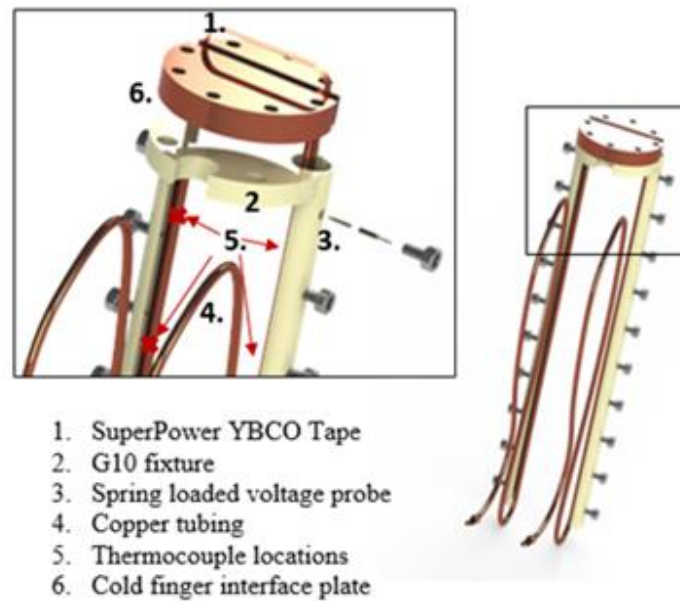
Solidworks Assembly render of the superconducting current leads, G10 fixture, and spring loaded voltage taps
